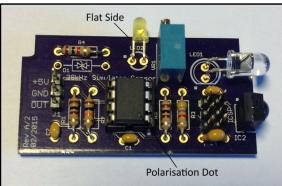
Completed 38kHz Infra-Red Sensor Head PCBs
